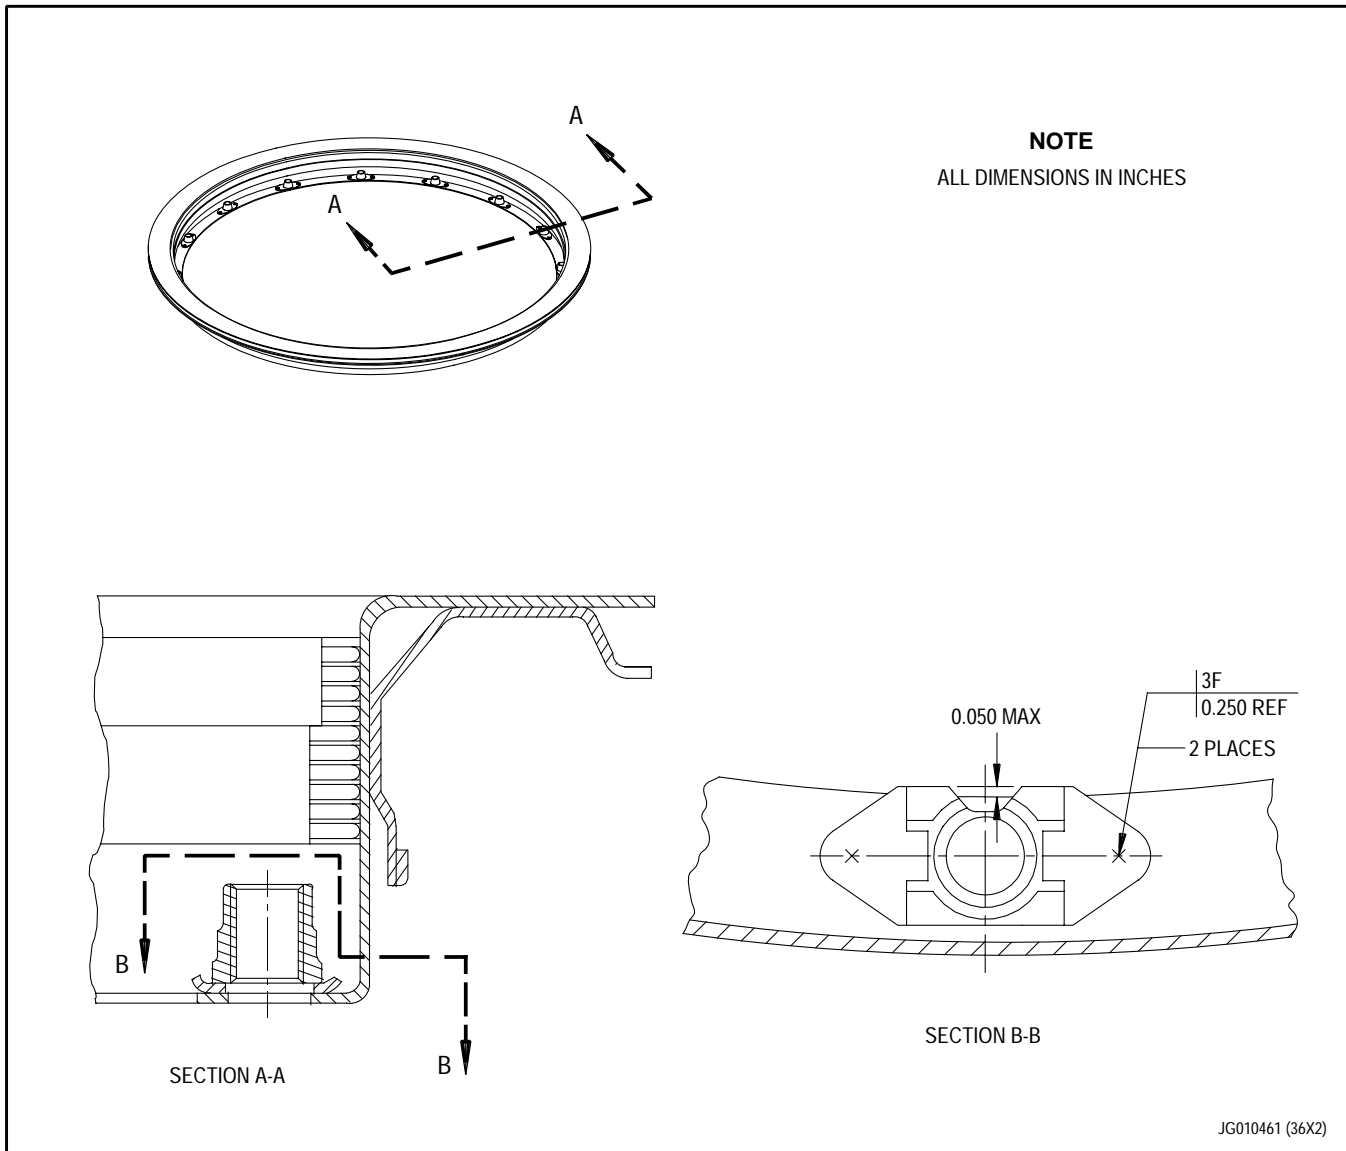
First Stage Turbine Outer Air Sealing Ring - Plate Nut Replacement.
